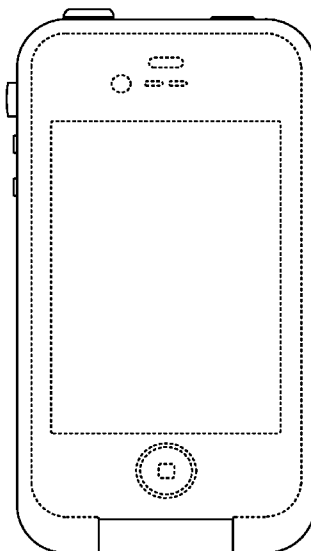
is a drawing of a top exterior view of a case for an electronic device.
